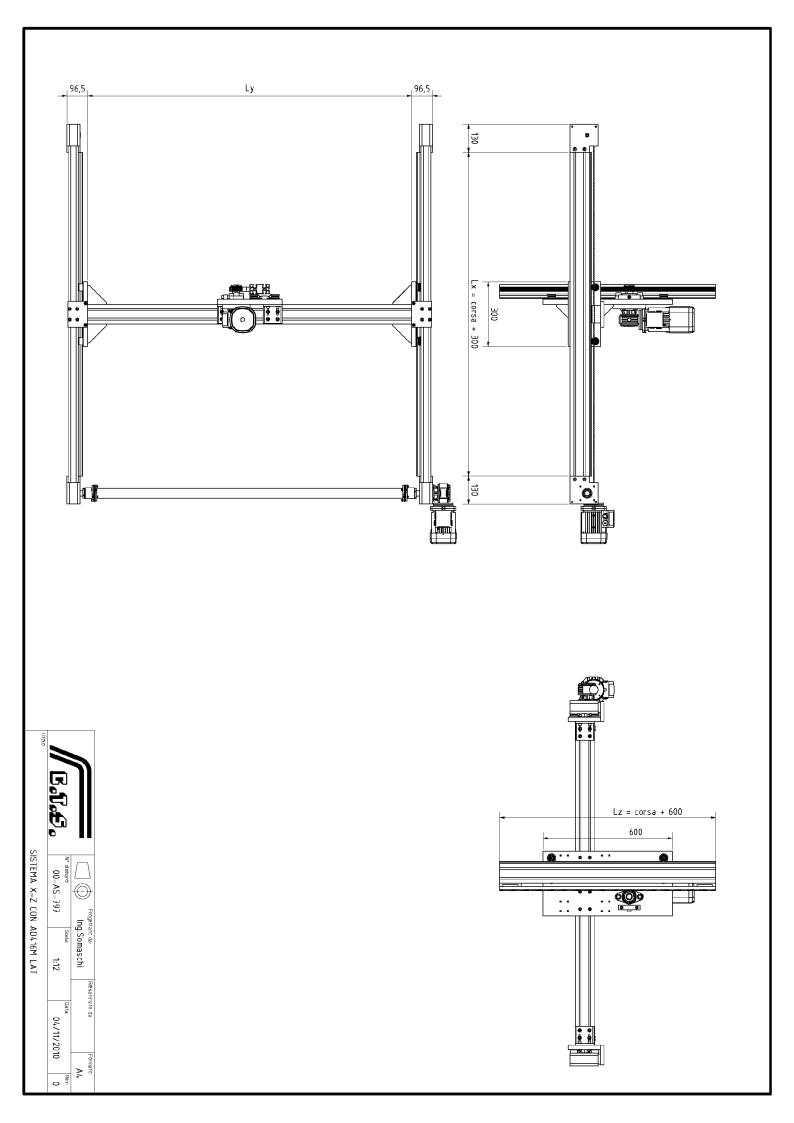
AS-797 MEDIUM VERSION WITH AD210/416 GUIDES
